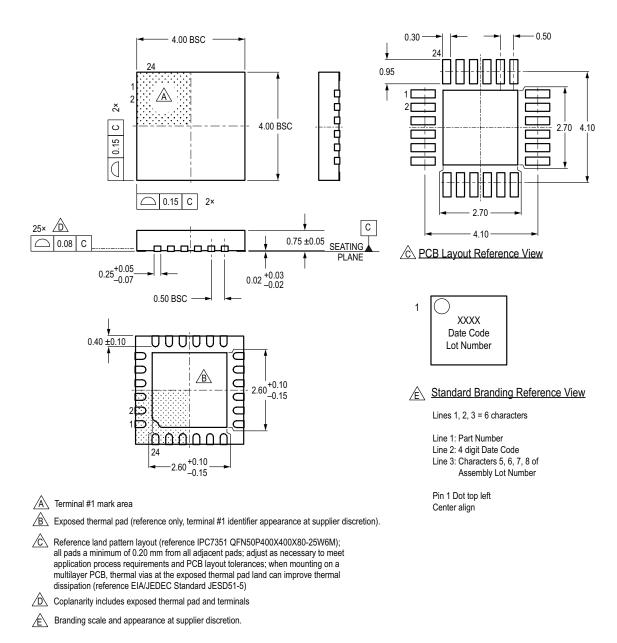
Package ES, 24-Contact QFN with Exposed Pad
